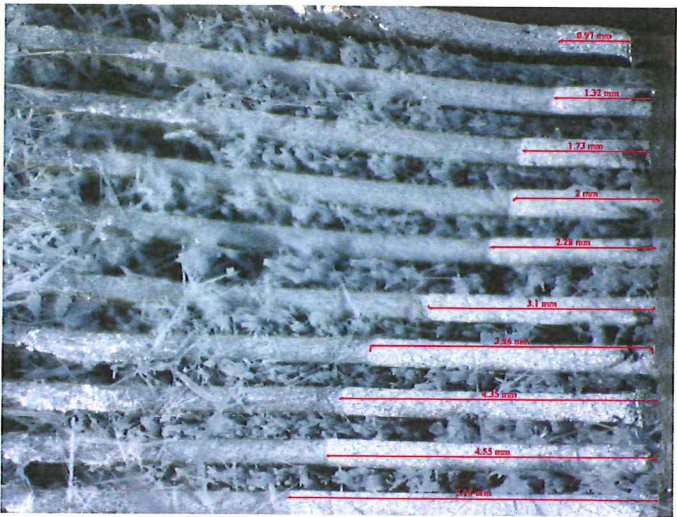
Fatigue crack length measurement with microscope
